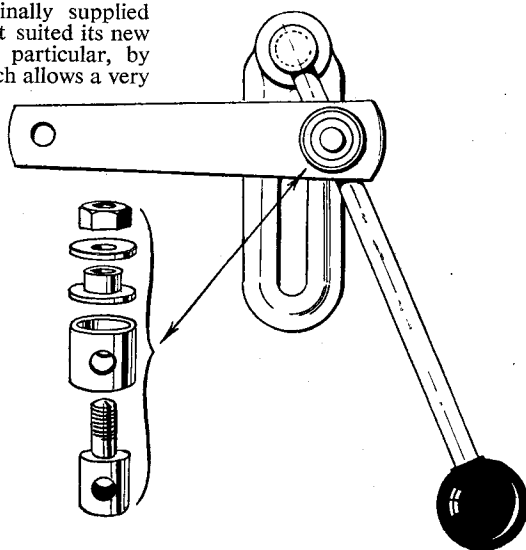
The hand-stroking device, with an exploded view of the adjustable-pin
